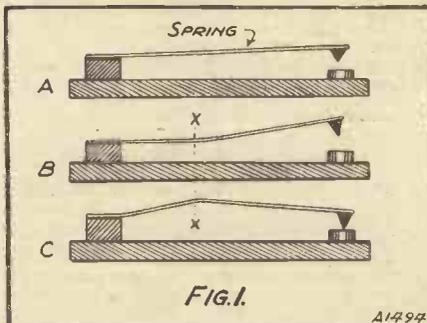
This picture illustrates the effects of correctly (C) and incorrectly (B) bending a switch spring that is not making good contact (A).
